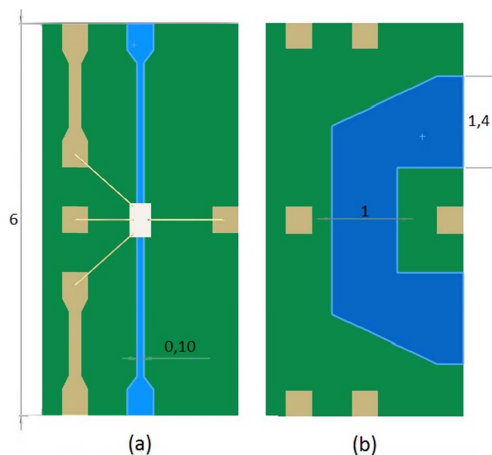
CoB package proposal, top traces view (a) and bottom traces view (b). Dimensions in mm.
